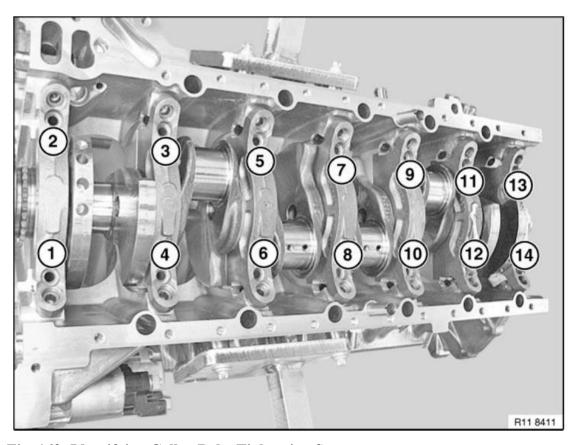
Identifying Collar Bolts Tightening Sequence Courtesy of BMW OF NORTH AMERICA, INC.
